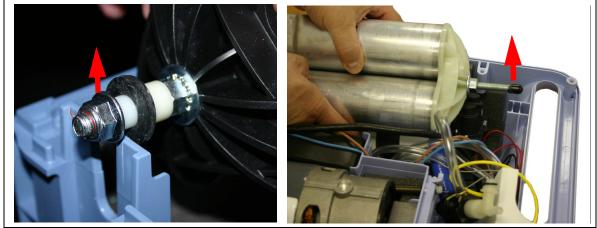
SIEVE CANISTER ASSEMBLY REMOVAL
